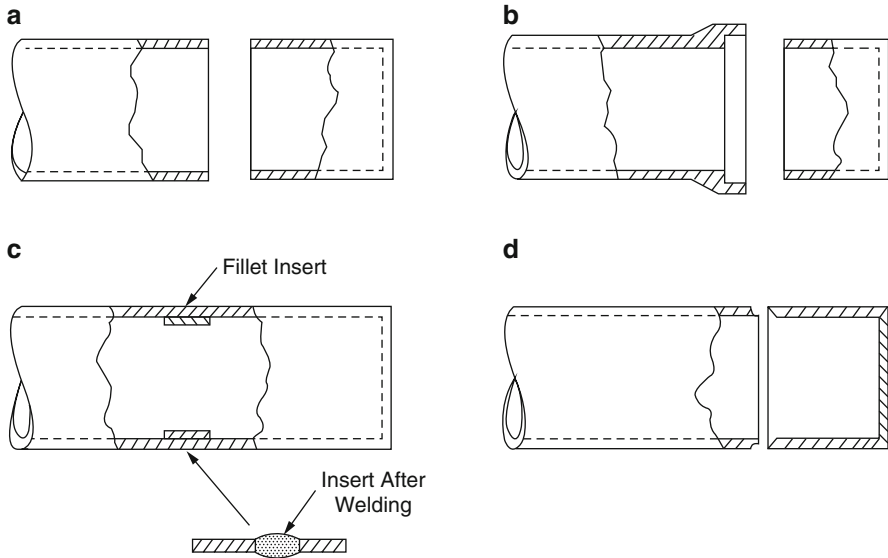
Typical joint design for end cap welding [2]. (a) Butt joint, (b) lipped butt joint, (c) fillet joint, (d) lap joint
